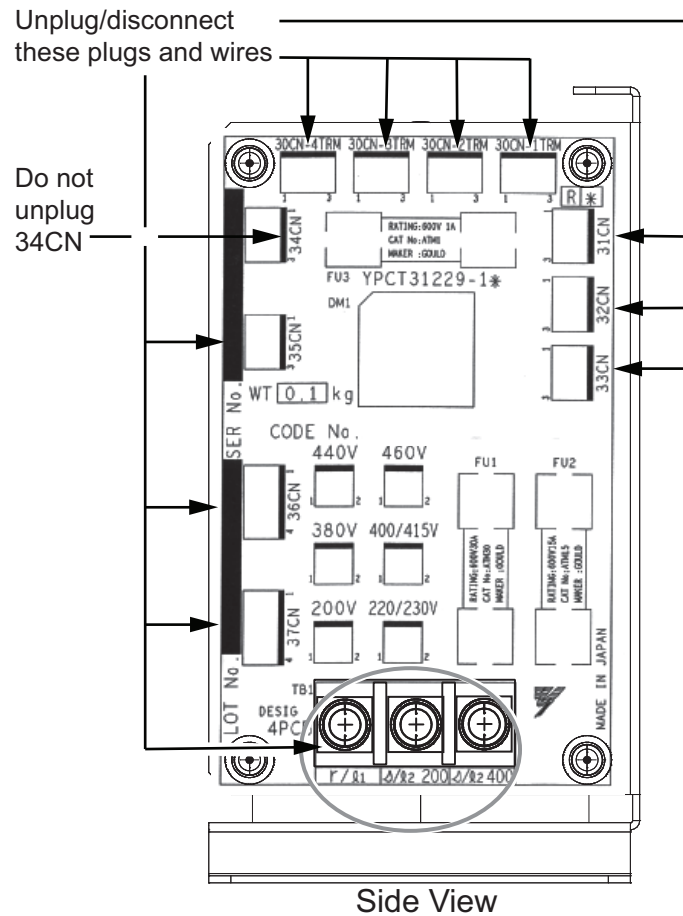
Power Supply Unit Plug and Removal on 4PCB
